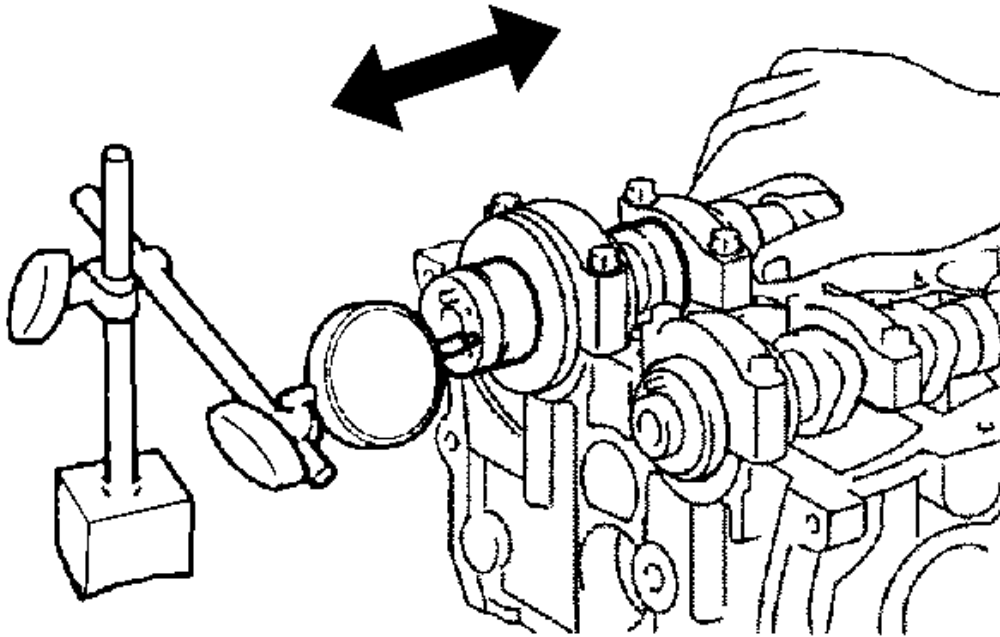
Checking Camshaft For Clearance & Movement On Head
